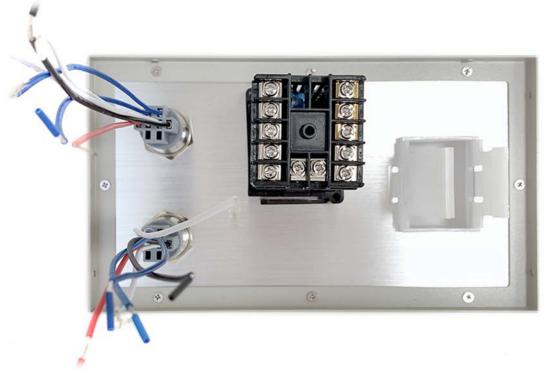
Add wiring harness to the switches and mount breaker bracket.
